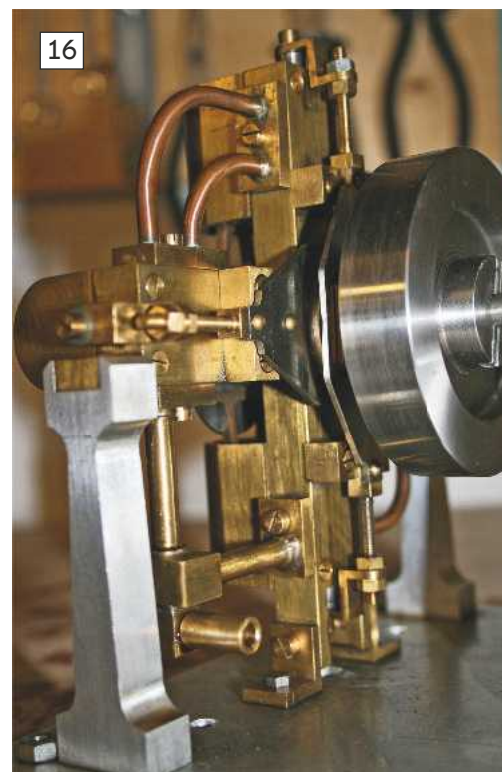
The final view of Harmonique engine giving you an idea of the complexity of manufacture that has gone into this model engineering masterpiece. I would dearly love to know who built this and know a bit more about its history.
